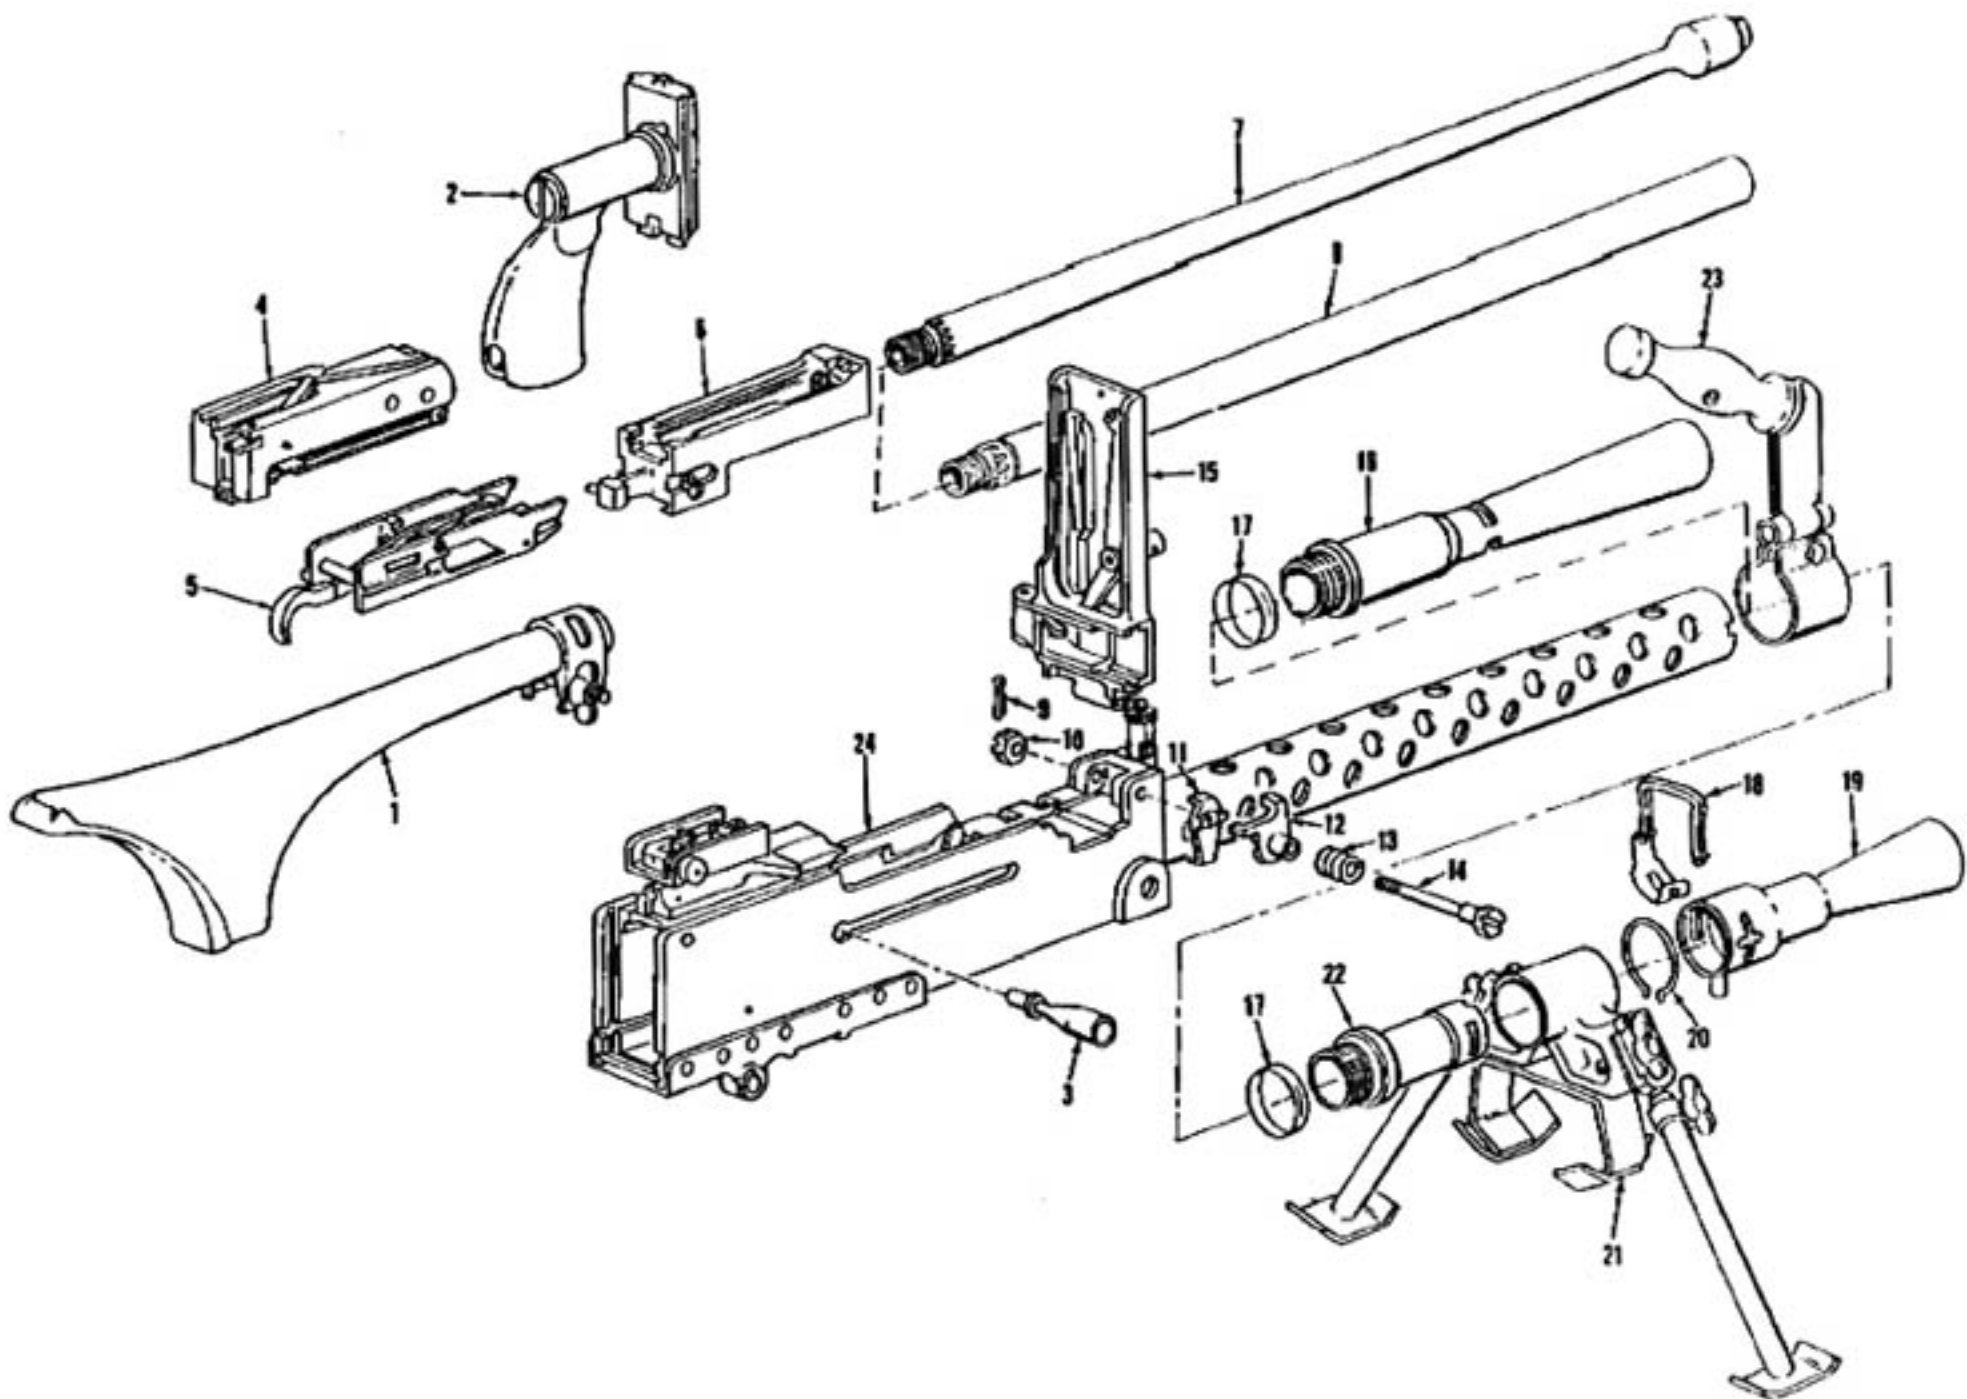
Caliber .30 Machine Guns, M1919A4 and M1919A6—major groups and assemblies—partial exploded view.
